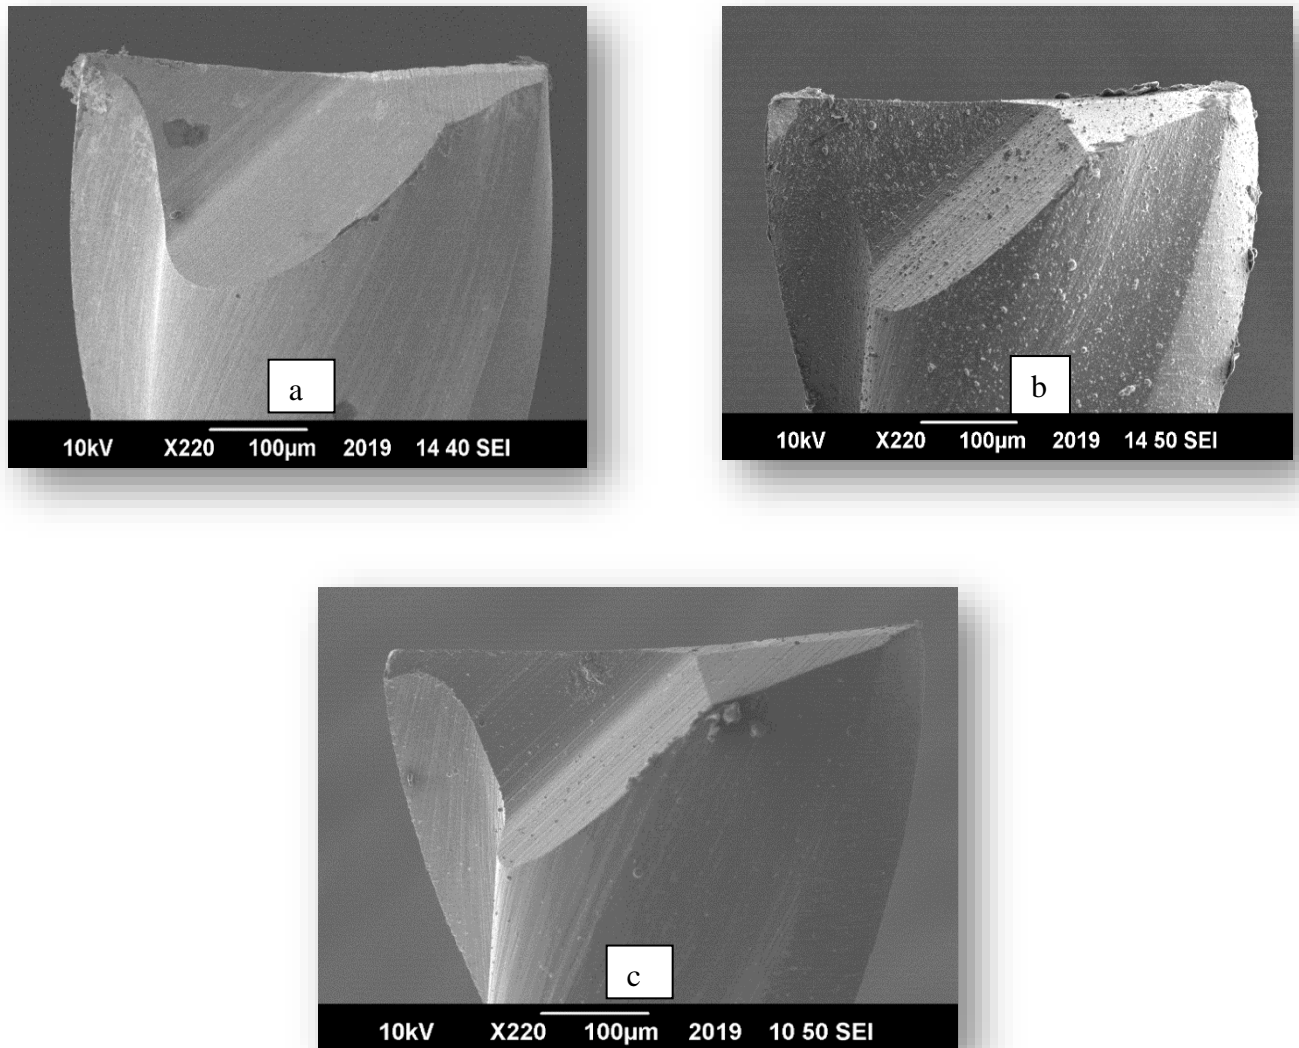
SEM Front view of (a) Uncoated Tool (b) AlTiN Coated Tool (c) nACo (AlTiN and SiN) Coated Tool
